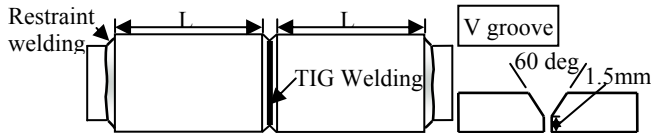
Schematic illustration of tube restraint weld cracking test.
